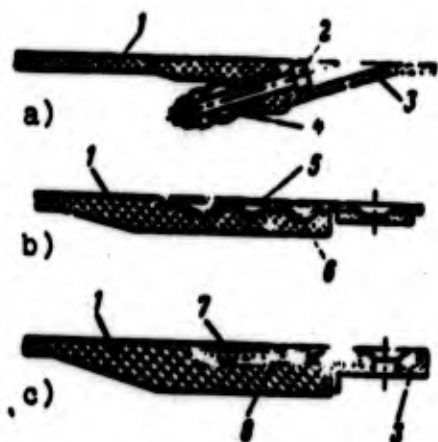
Types of elastic joints between ceramic parts and metals and plastics: a) bolted; b) with grooves; c) winding. 1 - ceramic parts; 2 - bolt; 3 - metallic case; 4 - tubular spring; 5 - stretched metallic sheet; 6 - compressed sheet; 7 - winding with wire or fiberglass tightening; 8 - plastic, set with tightening.
